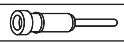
Series 800...007	Single Row Solder Cup / Solder Tail
